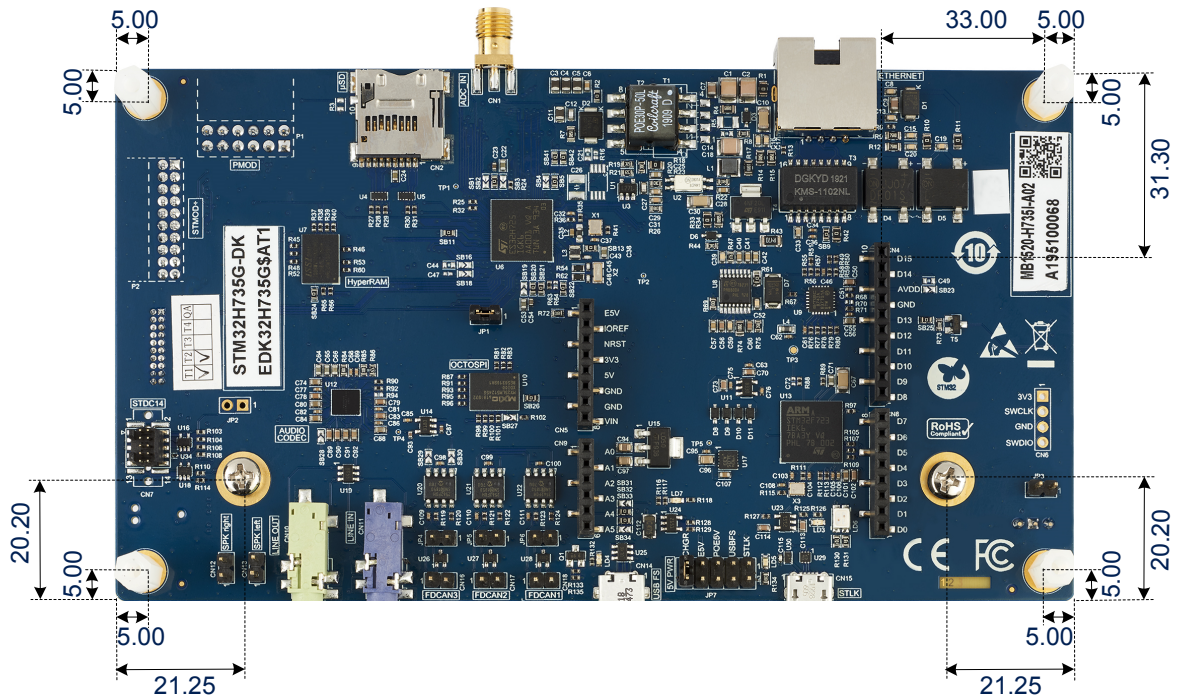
STM32H735G-DK mechanical dimensions (bottom view) in millimeters
